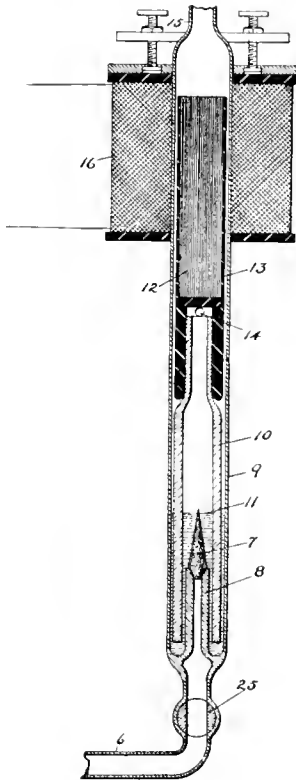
Cross-sectional Drawing of the Electro Magnetic Feed Valve
